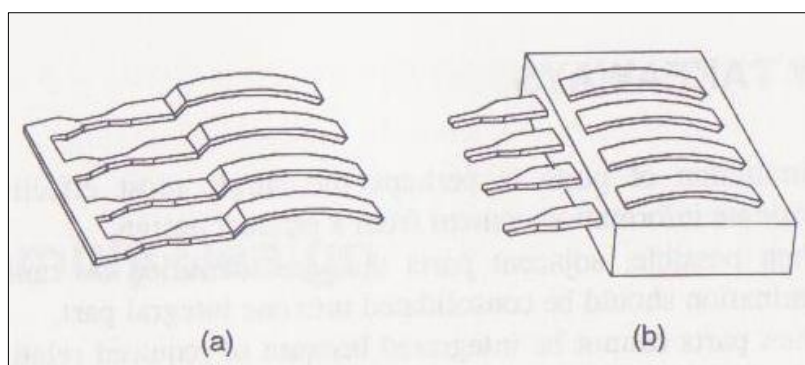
Reduce information content by postponing discretization. (a) The terminals are fabricated as a sheet metal stamping and assembled as a unit. (b) After insert molding, the connecting piece is cut away.
